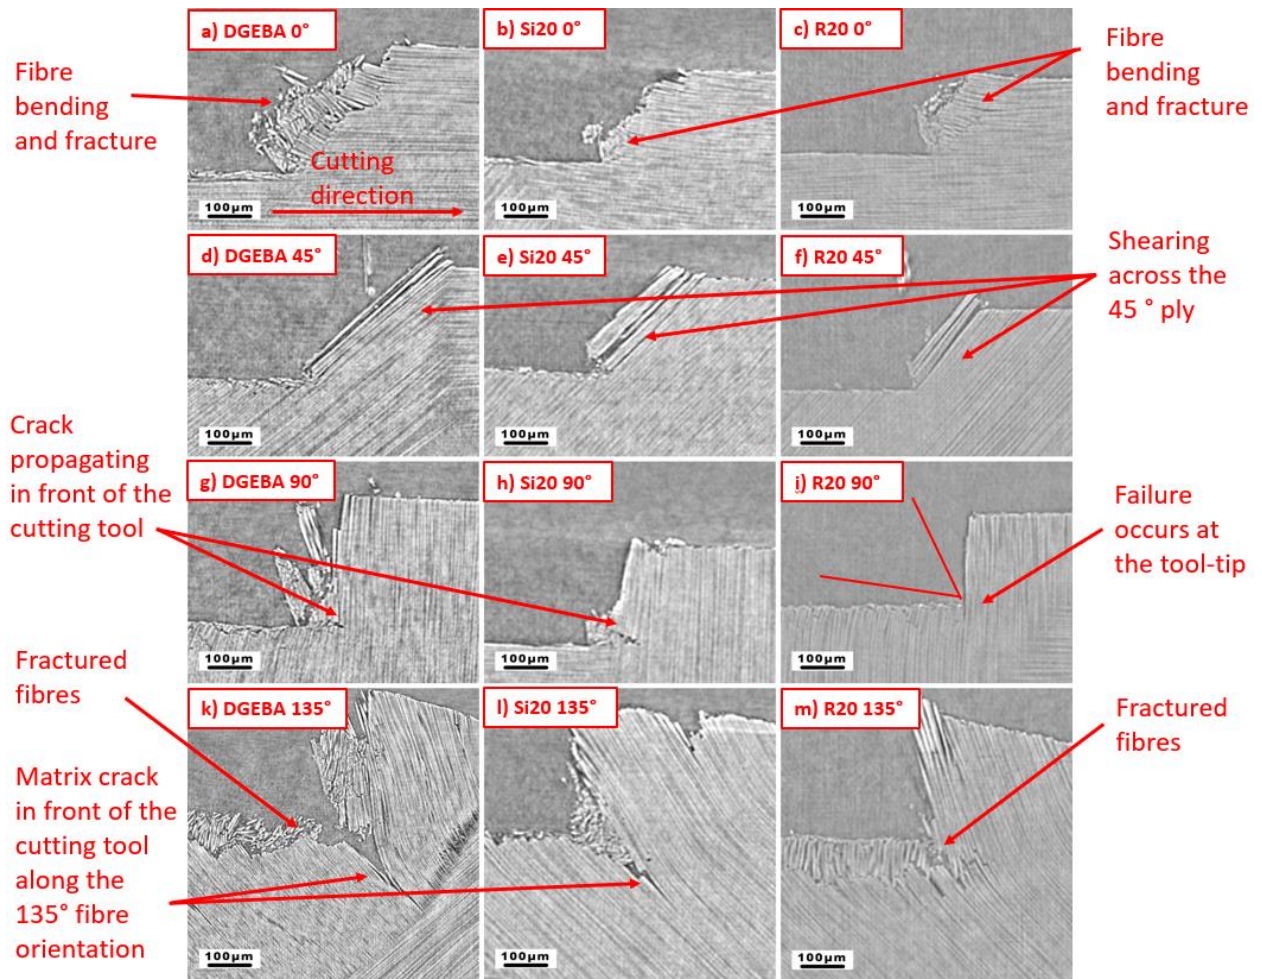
2D slice examples of interrupted cutting for DGEBA (a, d, g, k), Si20 (b, e, h, l) and R20 (c, f, i, m) samples showing machining induced damage
